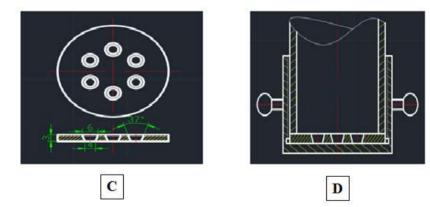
Bun mold C- The arrange the hole on the mold, D- Extruder assembly
